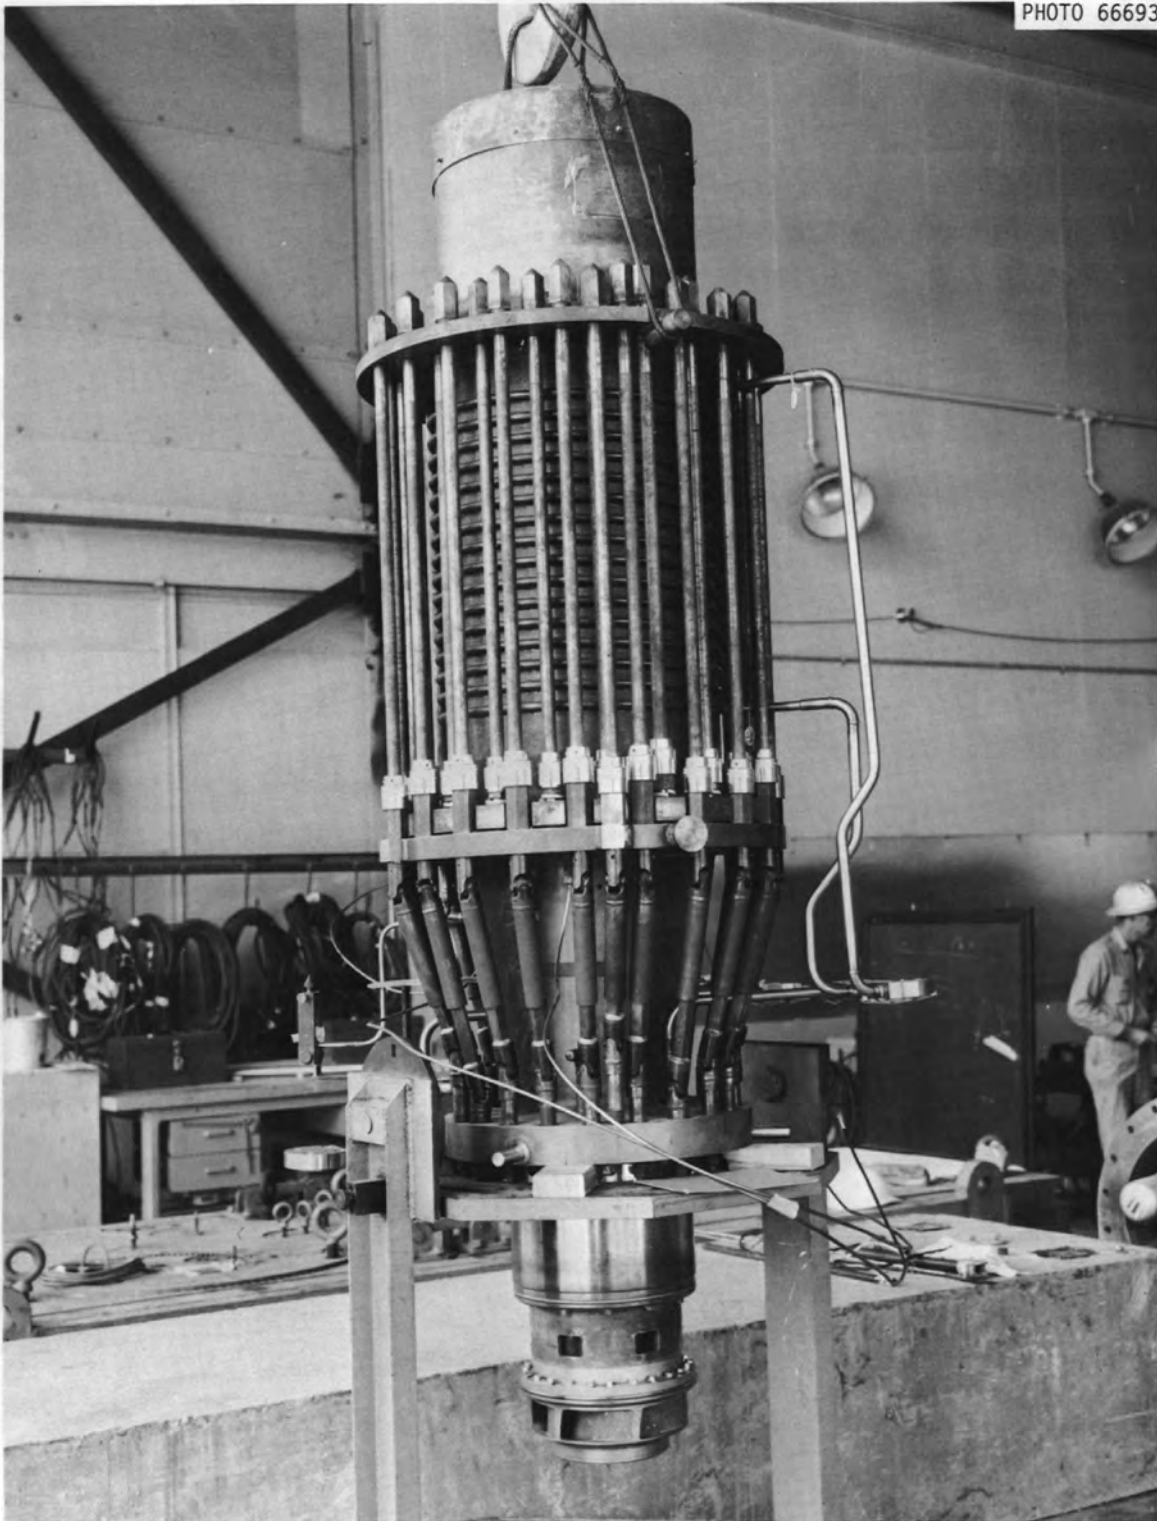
Fuel Pump Motor and Rotor Assembly Showing Flange Bolt Extensions
